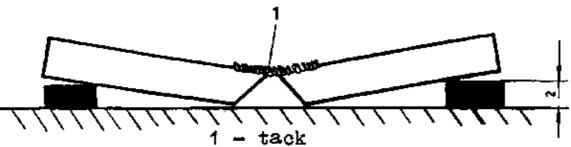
Tacking the V type weld in a roof-like configuration
